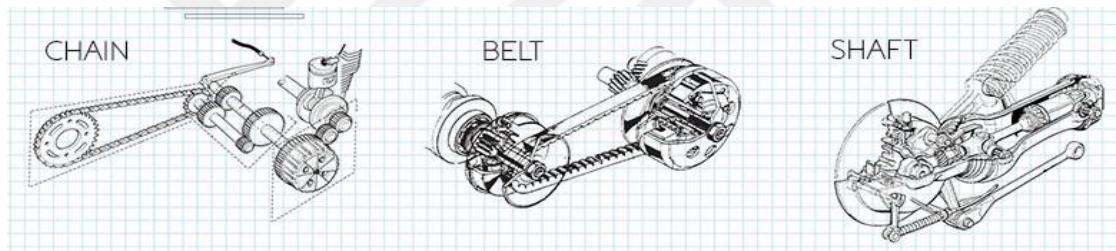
Belt Drive, Shaft Drive, and Chain Drive [33]
